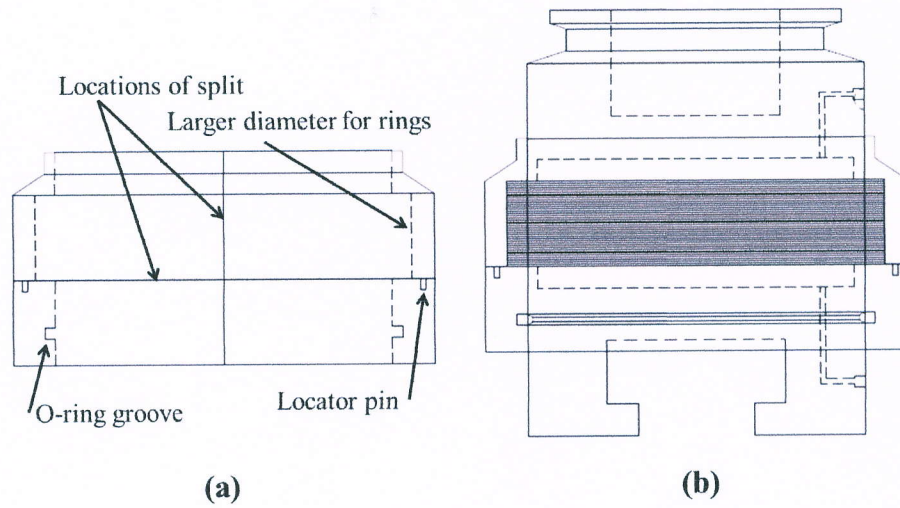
Split mold (a) cross-sectional view (b) schematic of split mold and sample
